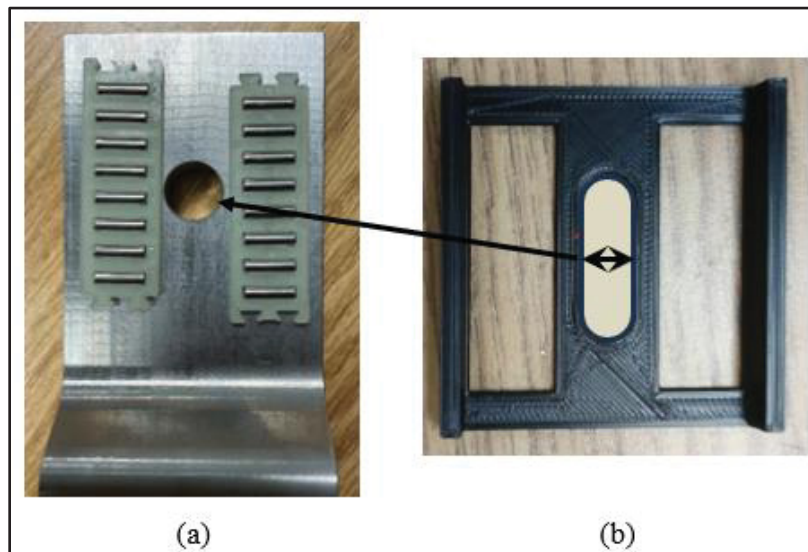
(a) Roller bearings (INA-HYDREL FE series) on contact face of steel clamped member, (b) 3D printed hard plastic housing
